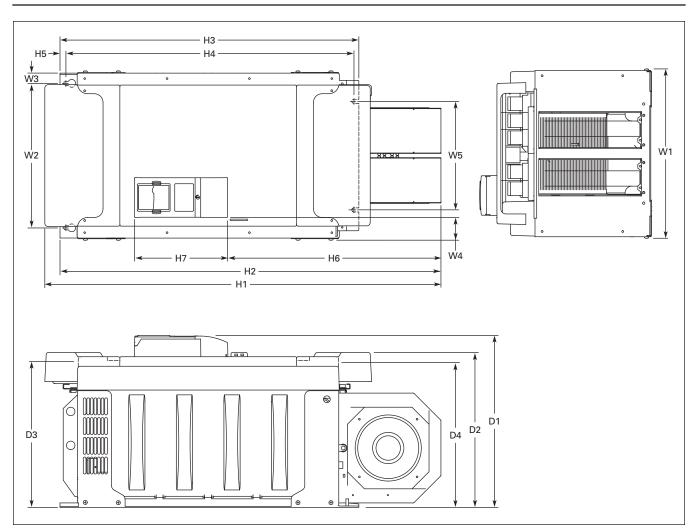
9000X Dimensions, FR10 Open Chassis
